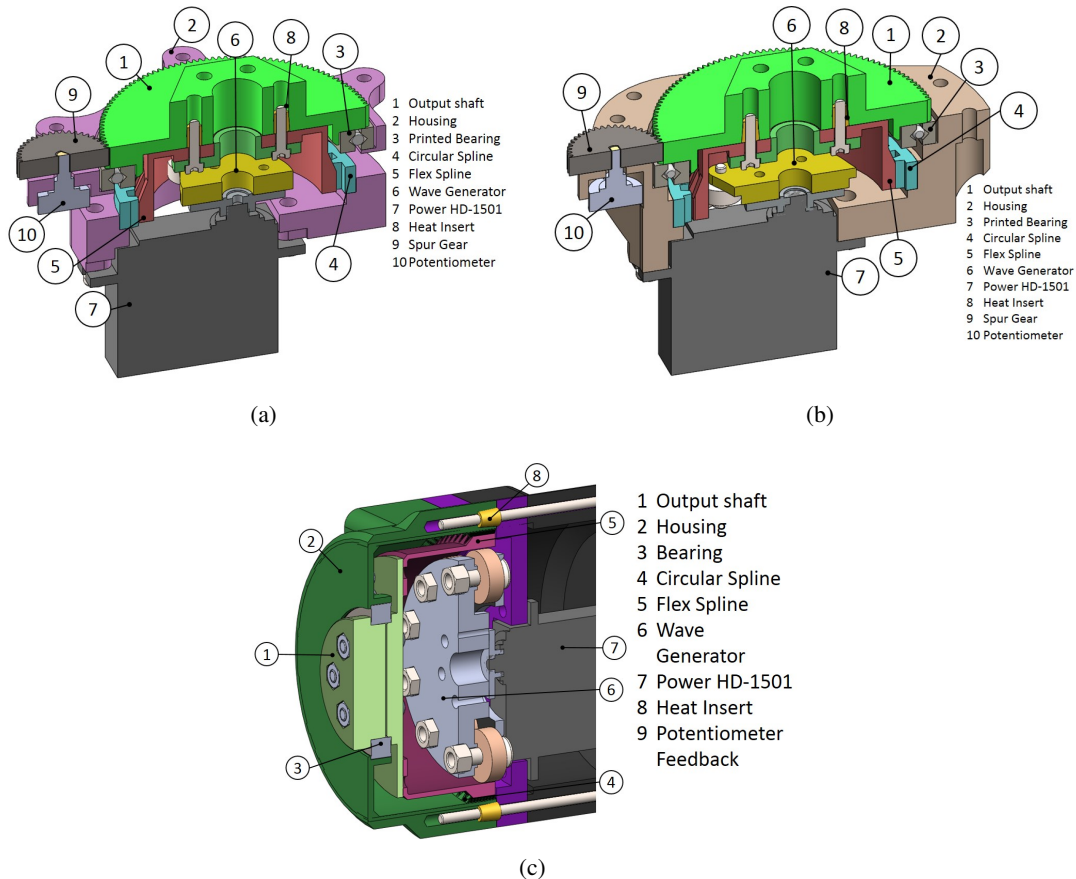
Sectional view of Harmonic drives for hip roll (a), yaw (b) and pitch (c) joint
